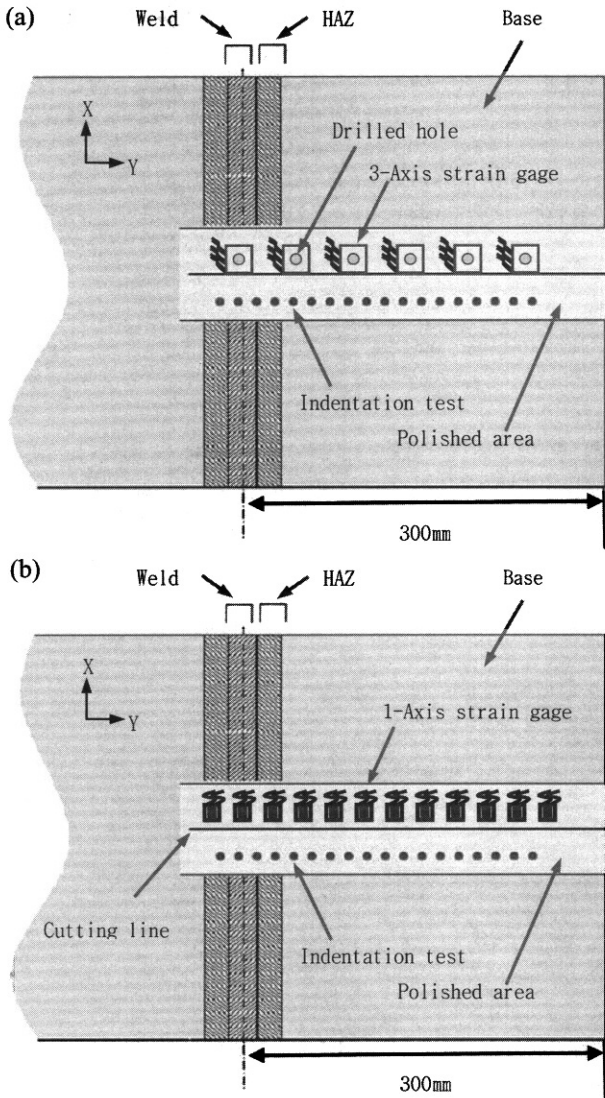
Schematic diagram for Continuous indentation and (a) 3-axis strain gages and drilled hole and (b) attached 1-axis strain gages and cutting line on welded joint of API X65 and SS400 specimens.
